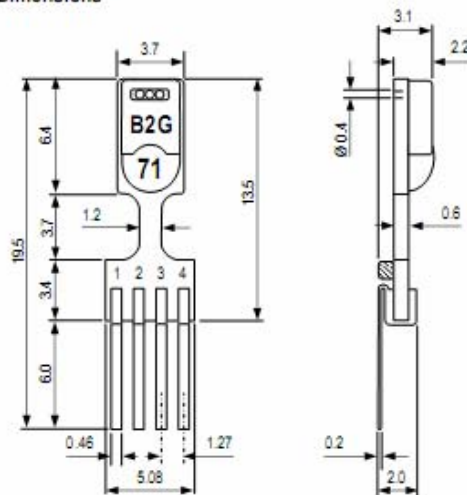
Drawing of SHT7x (applies to SHT71 and SHT75) sensor packaging, dimensions in mm (1mm = 0.039inch). Contact assignment: 1: SCK, 2: VDD, 3: GND, 4: DATA. Hatched item on backside of PCB is a 100nF capacitor – see Section 2.1 for more information.
